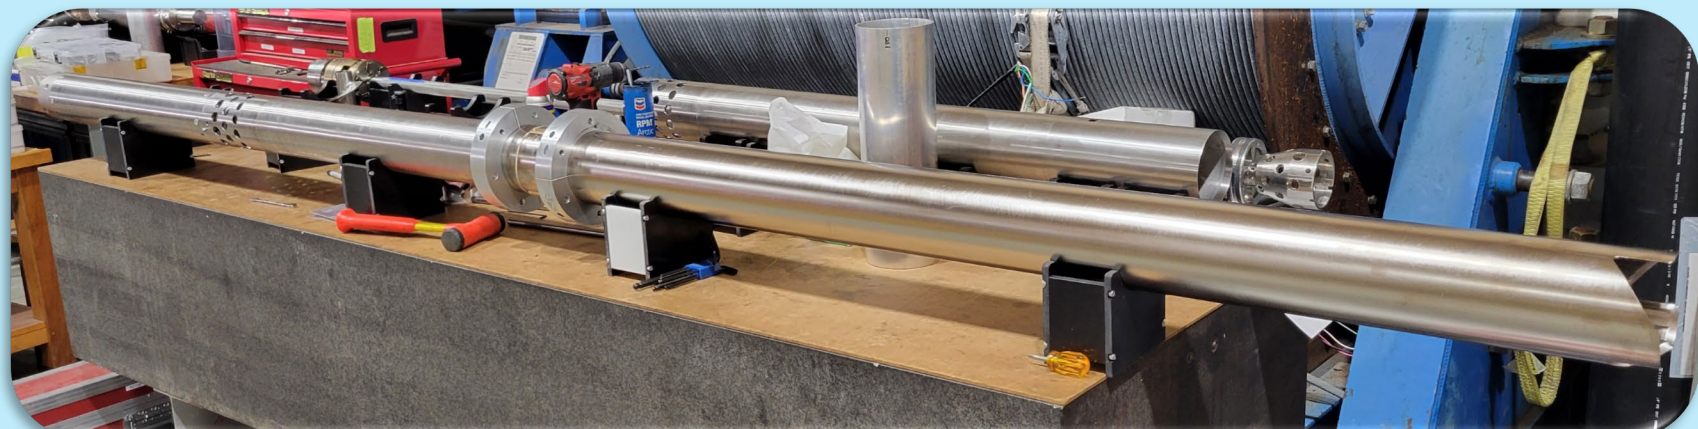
A partial assembly of the sonde with motor section (far left) and both sections of the outer barrel (center and right).
